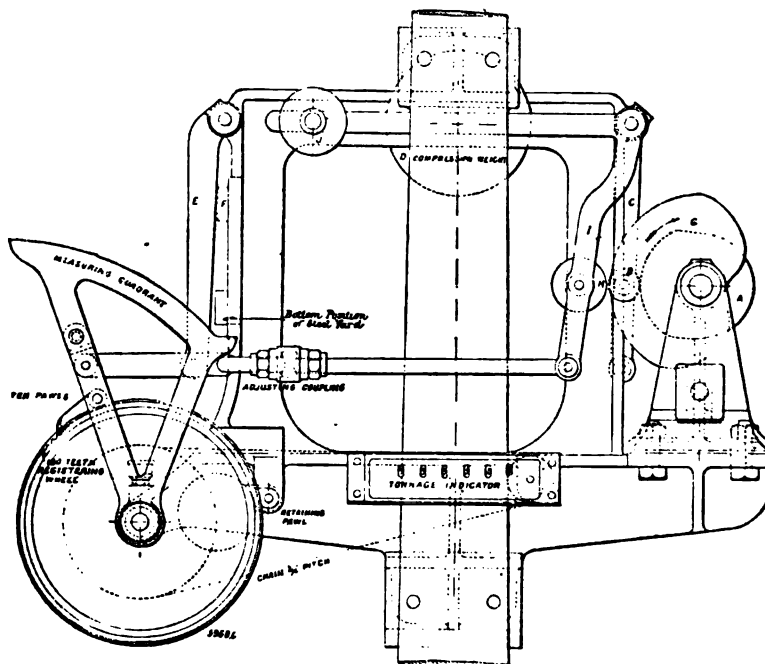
Diagram showing Cam and Quadrant Arrangements as used with the "Blake-Denison" Weighing Machine.
